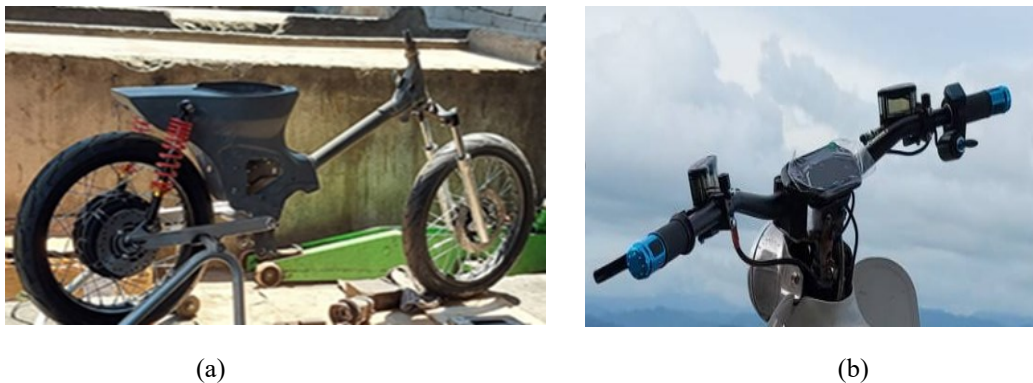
The dimensions of the engine room (a), the brake master and brake lever position of the C-70 motorcycle (b)
